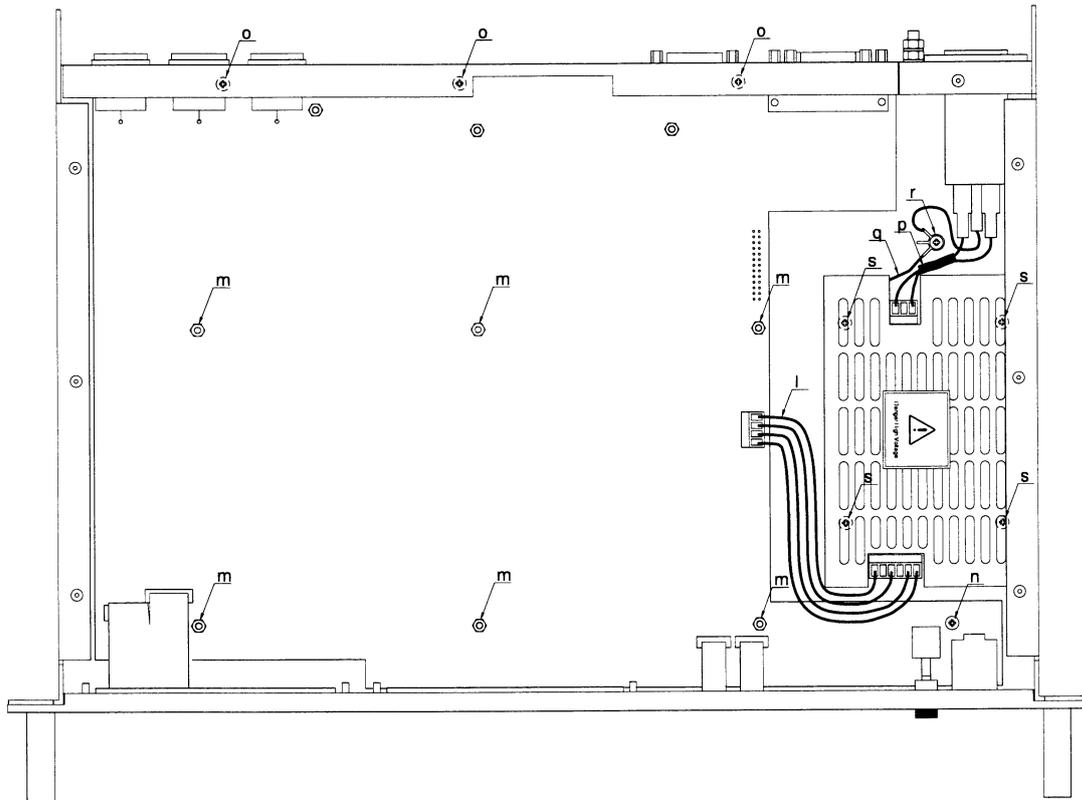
Plan of the Layer II Encoder/Decoder Board
